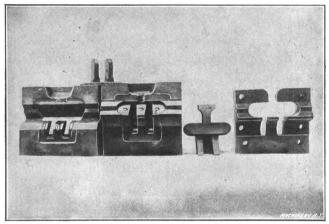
Lock Dies for Forging and Trimming a Special Hinge
